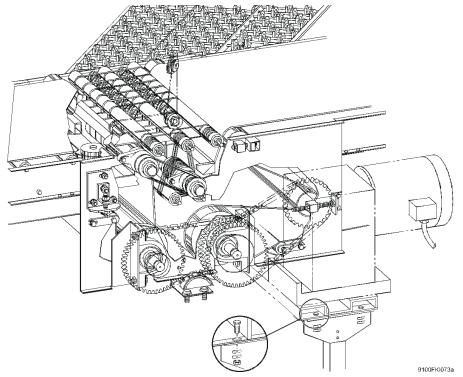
Single Leg Floor Support on Drive Motor Mounting Plate
